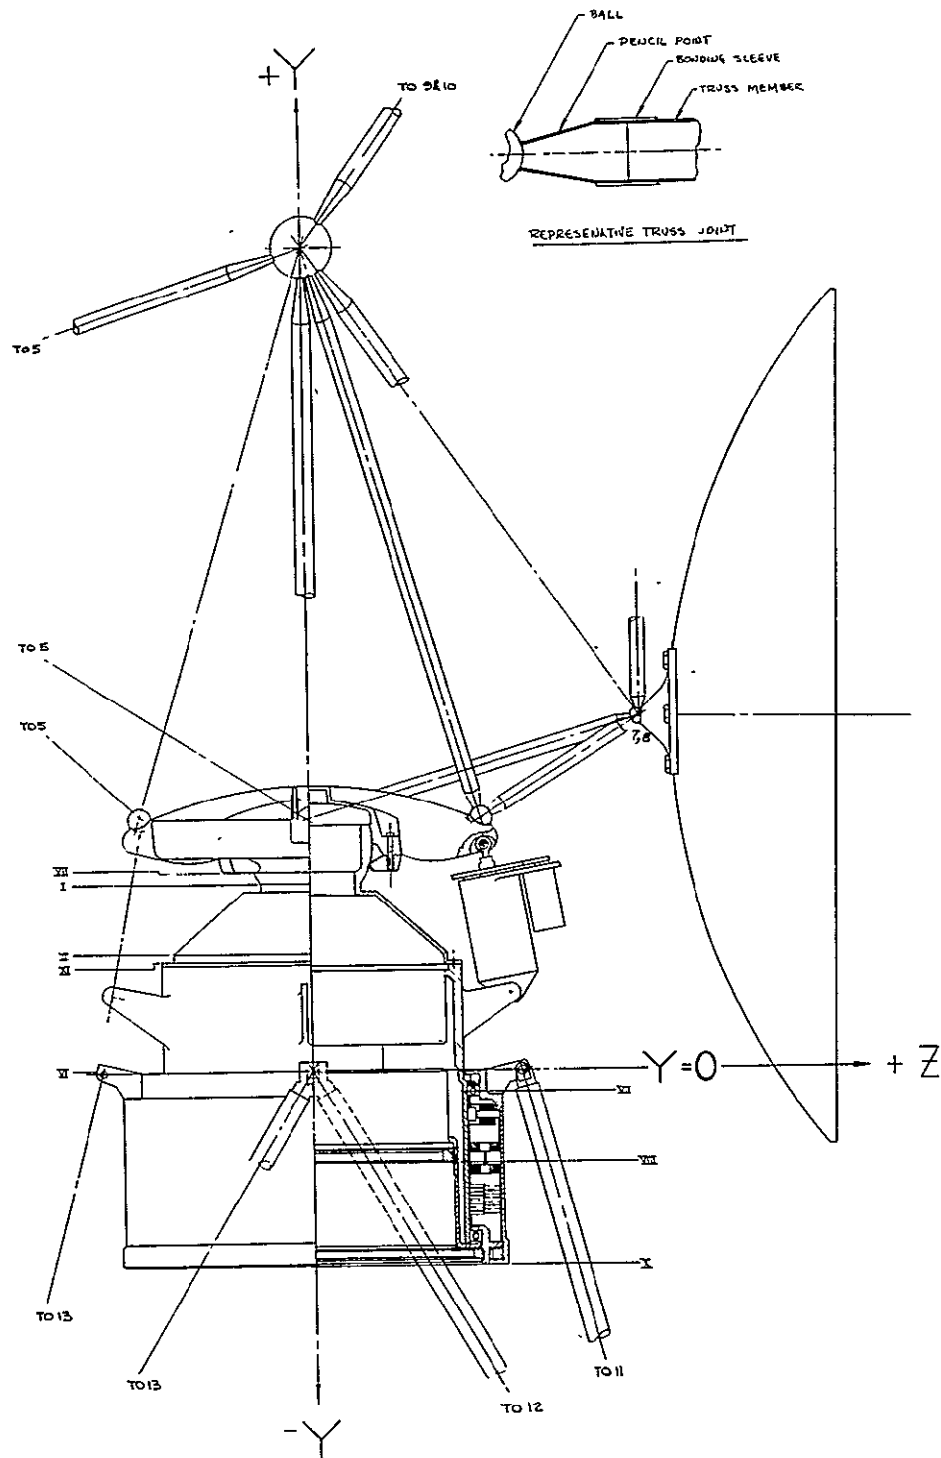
ANTENNA LAYOUT DESIGN, MOTOR DRIVE AND GIMBAL ASSEMBLIES (View 3)
